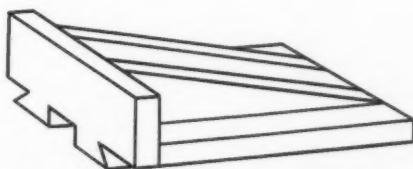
Pattern for a machine part, designed with loose wedge guide strips for casting in the cope, was returned and the strips fastened to the pattern, loose draws in pieces being made for the wedge as shown. Top brackets were made loose and cast in the cope. Foresight would have eliminated the extra pattern expense the design change necessitated.
